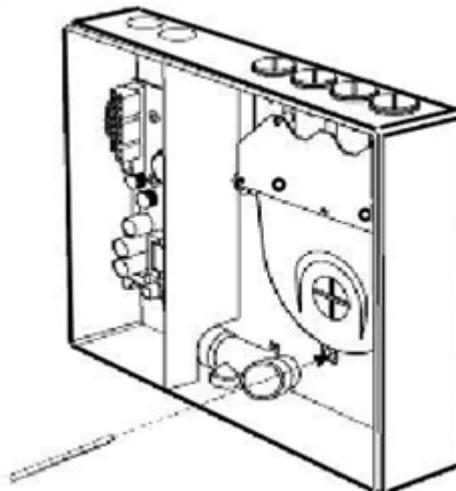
Removing Pipe Inlet Manifold during VLP and VLS chassis replacement
